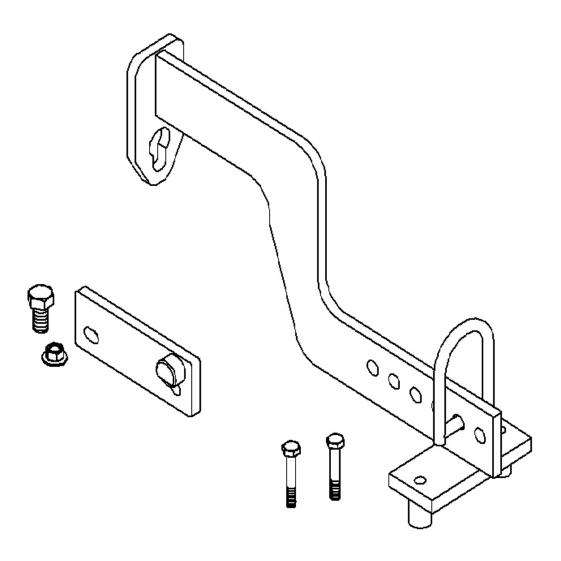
Engine Lift Fixture & Adapter Courtesy of CHRYSLER LLC
